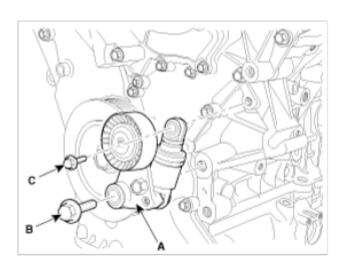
Identifying Drive Belt Auto Tensioner With Mounting Bolts
